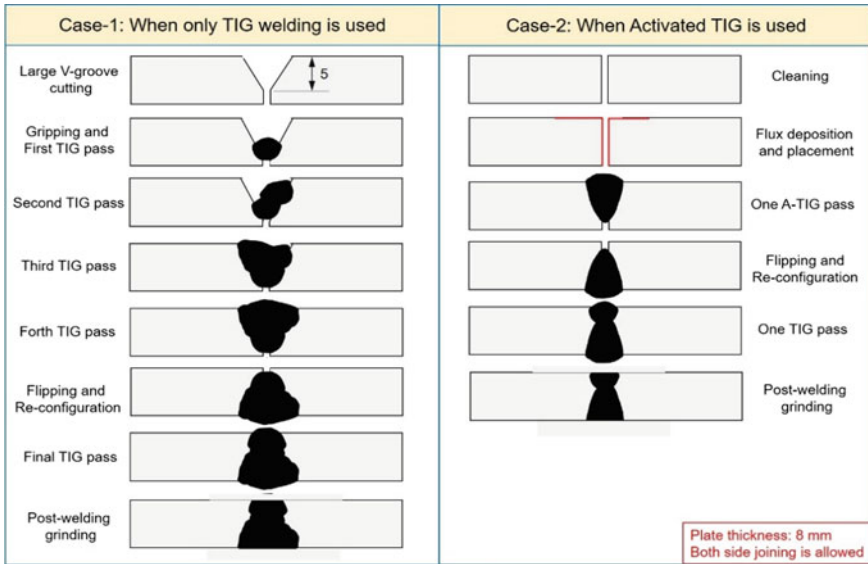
Schematic of the welding steps when joining from both sides is allowed [7]
